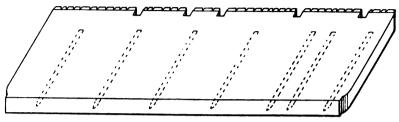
Linotype; finished type-slug. Slightly enlarged.
